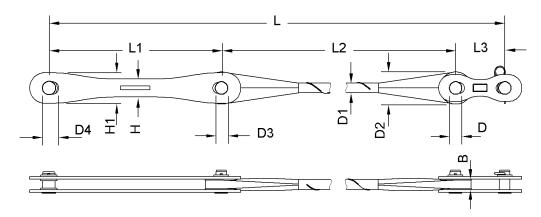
Dimensions of main boom pendant strap on 2821 boom head section
